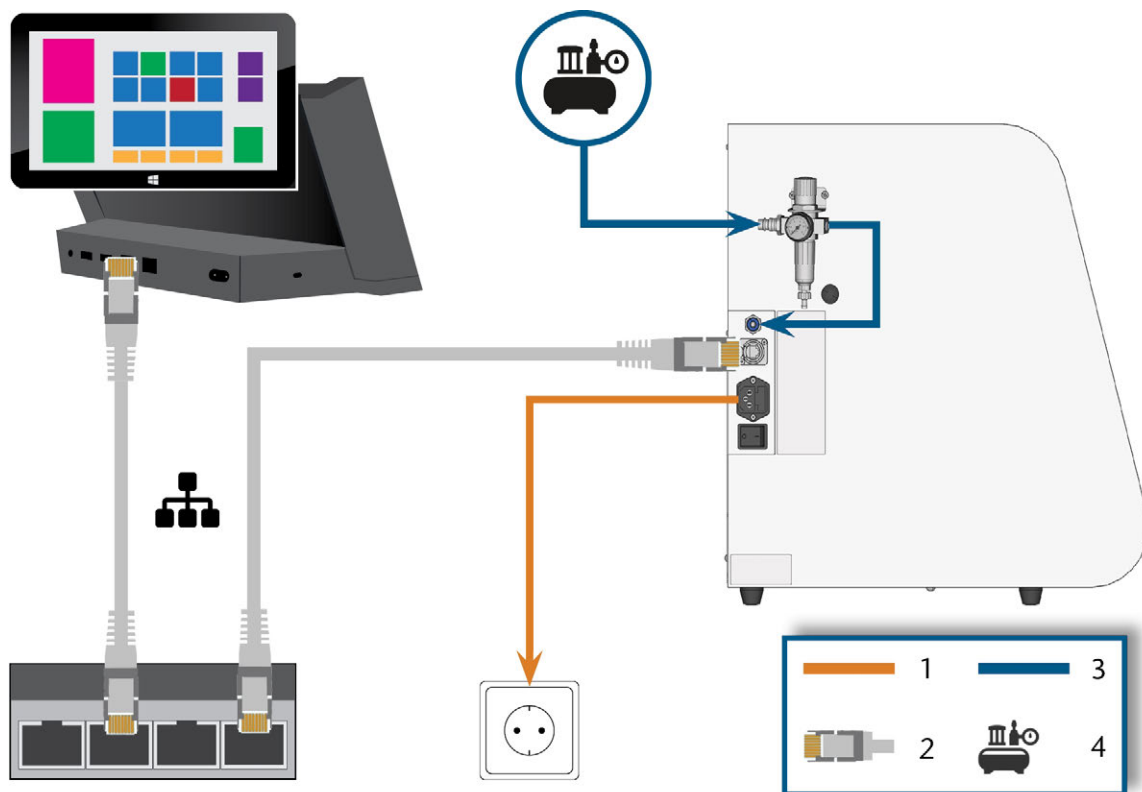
MACHINE INSTALLATION (SCHEMA)
